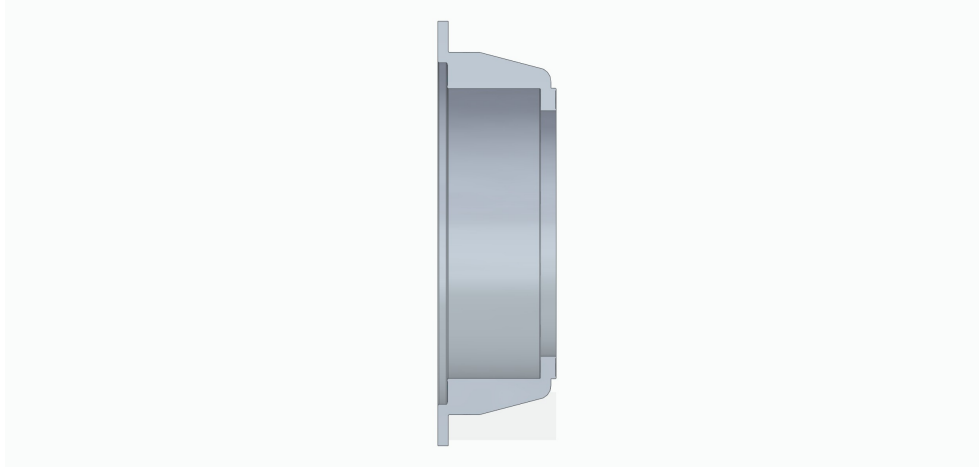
Section view of the Bearing Housing RS by Muñoz
